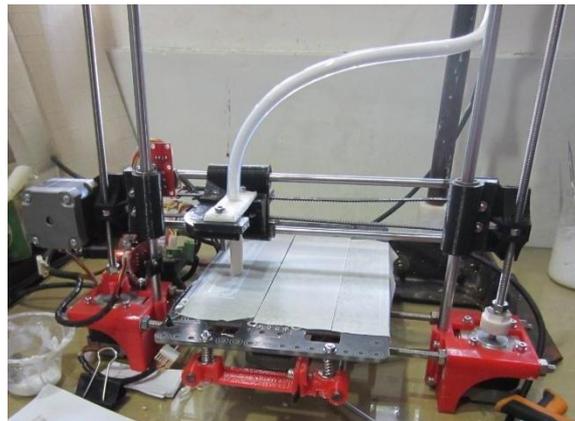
The process of printing test specimens using a three-dimensional printing machine
